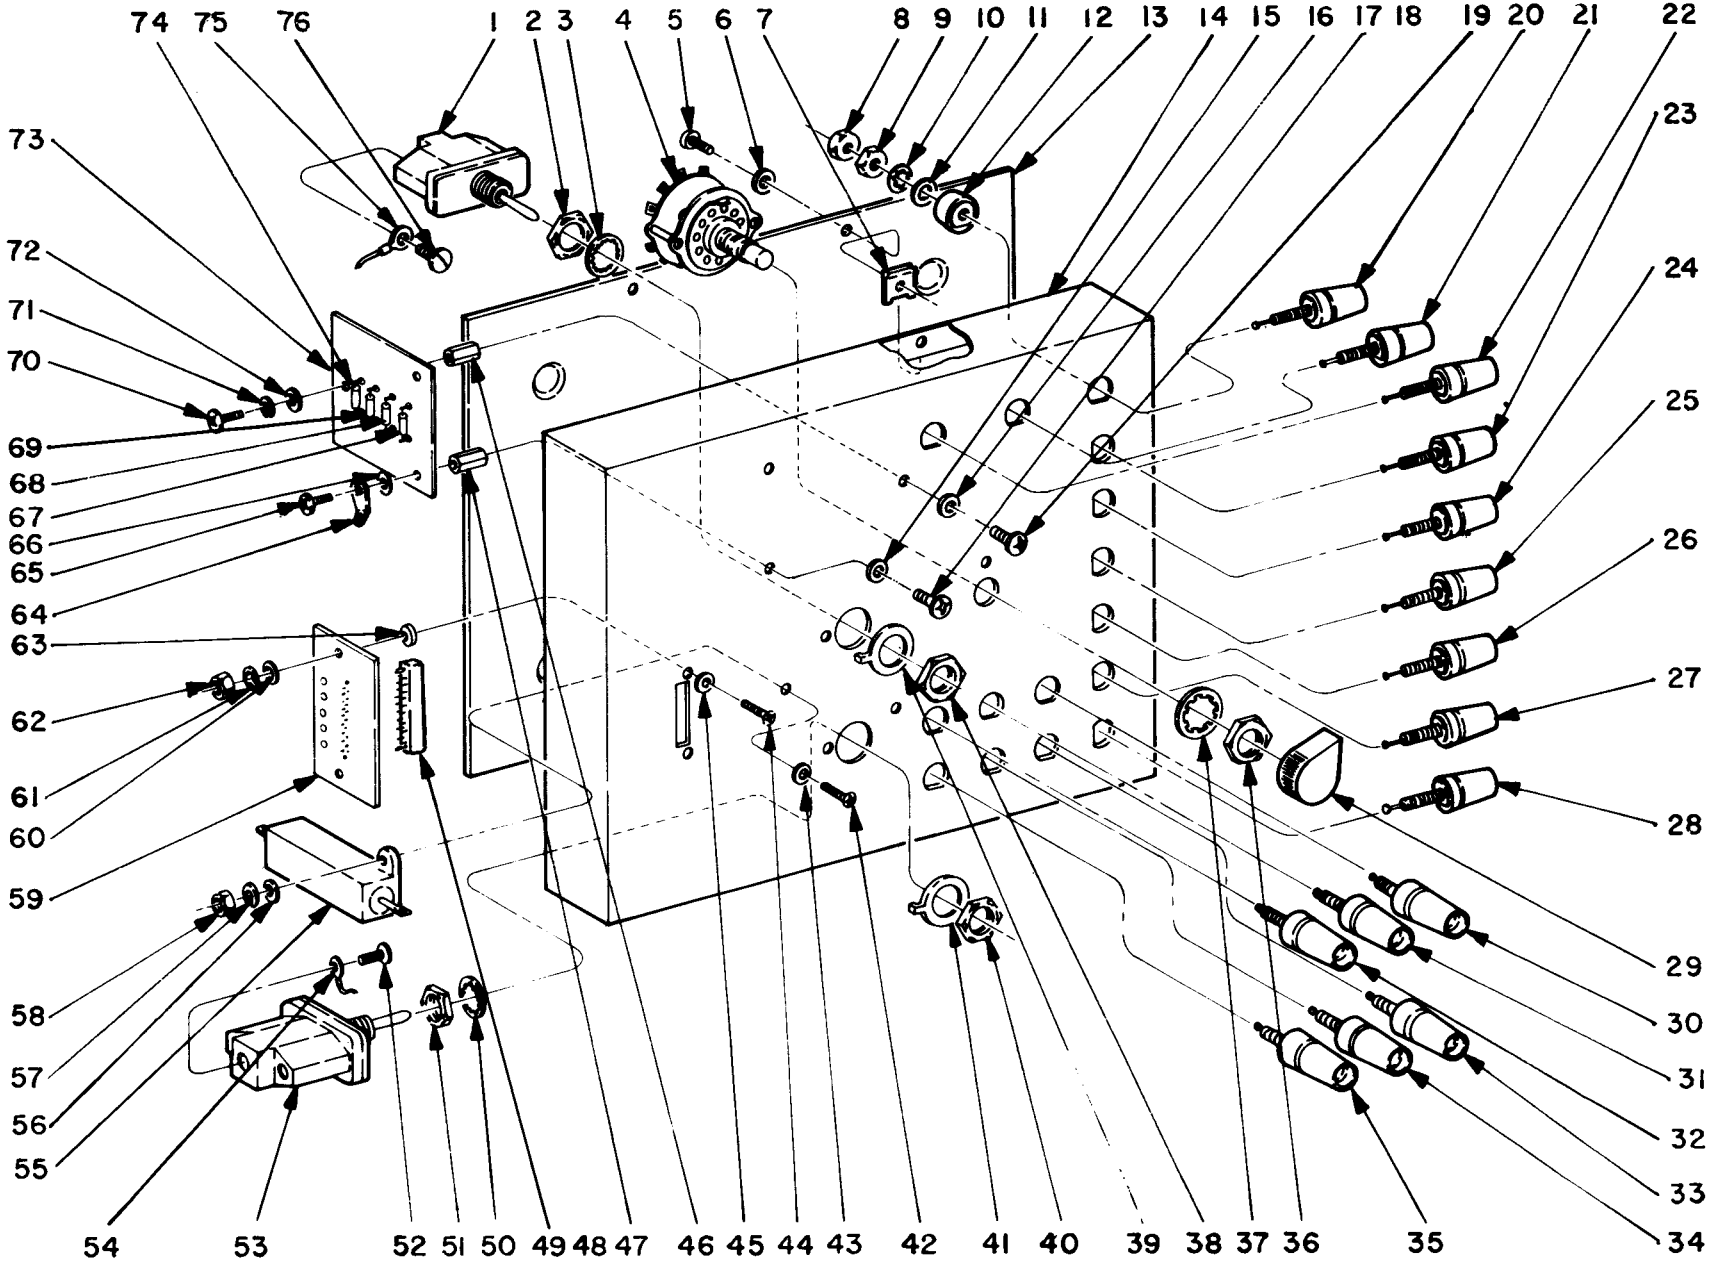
LINE FEED/CURRENT CONTROL TEST FIXTURE .
